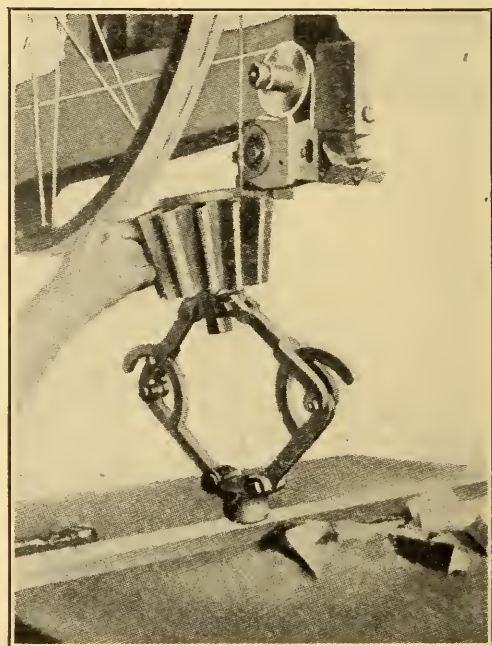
ADJUSTABLE ATTACHMENT OF SAWING OUT BEVEL GEAR PATTERNS.
